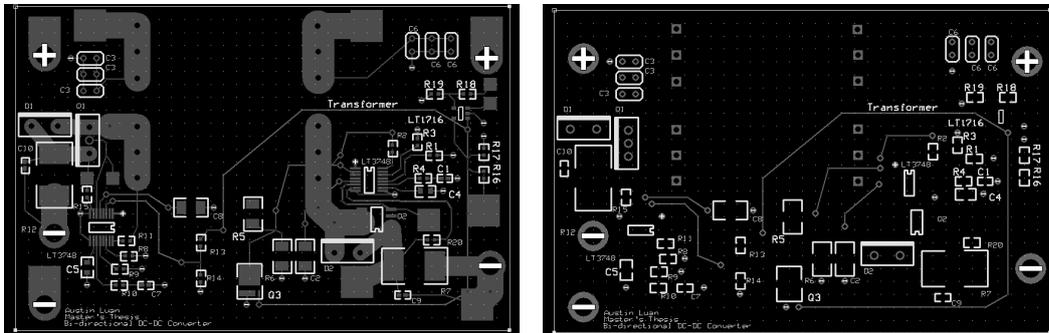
Top Layer with Silkscreen and Bottom Layer of PCB
